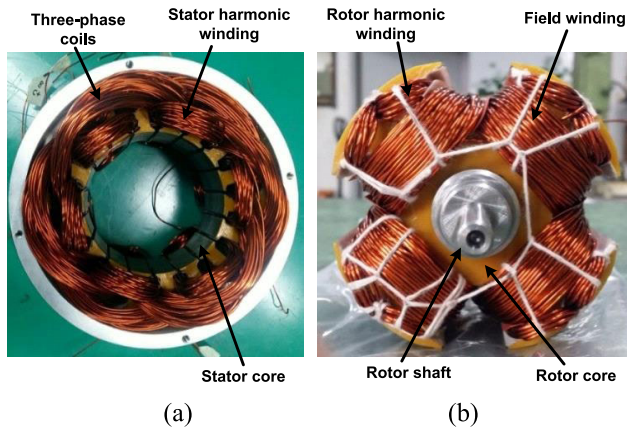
Prototype machine: (a) stator and (b) rotor.
